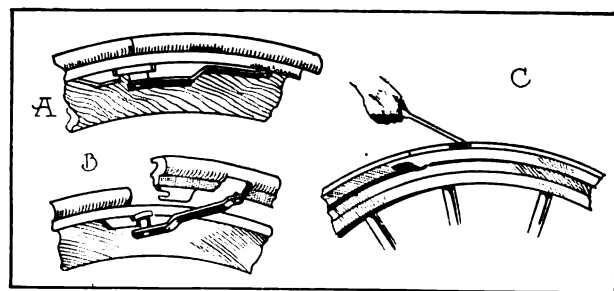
Rims Used on Overland Model 79 Cars: A, Locking Lever in Normal Position; B, Same Open; C, Using Screw Driver to Start Detachable Ring.
